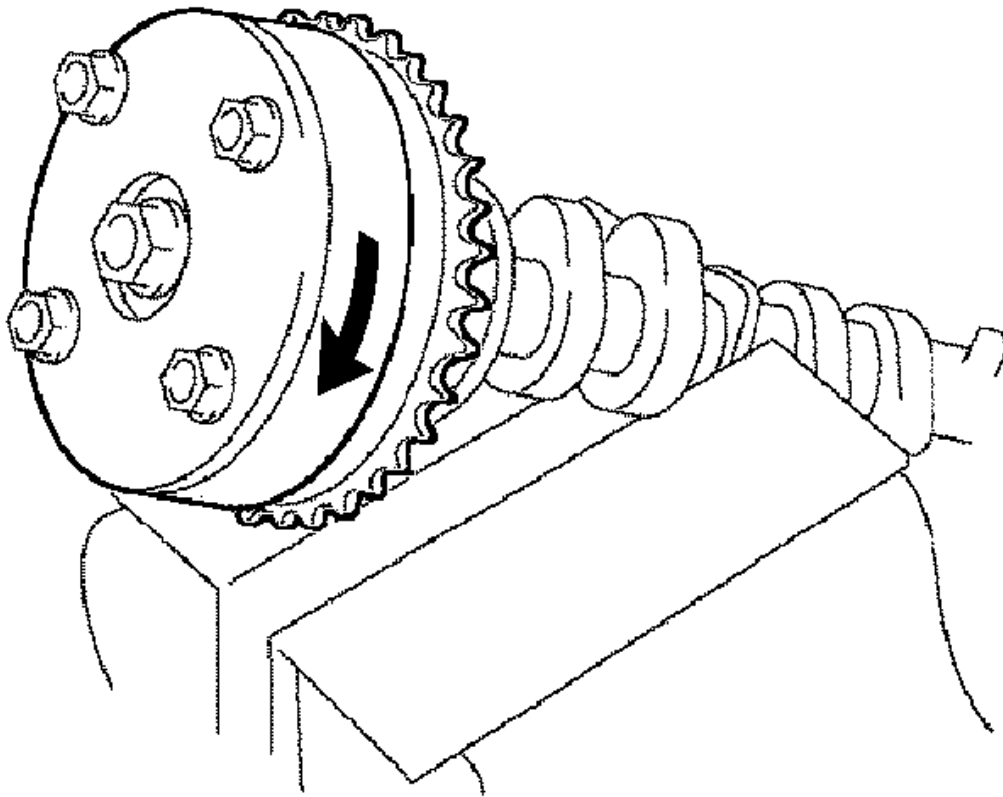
Rotating Camshaft Timing Gear In Retard Direction (Clockwise)
